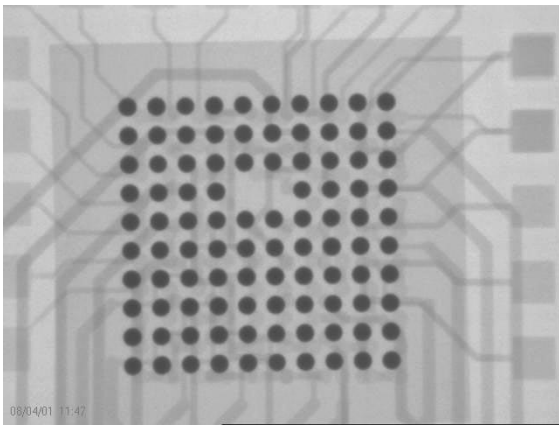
X-ray image of the assembly after reflow with low viscosity.
